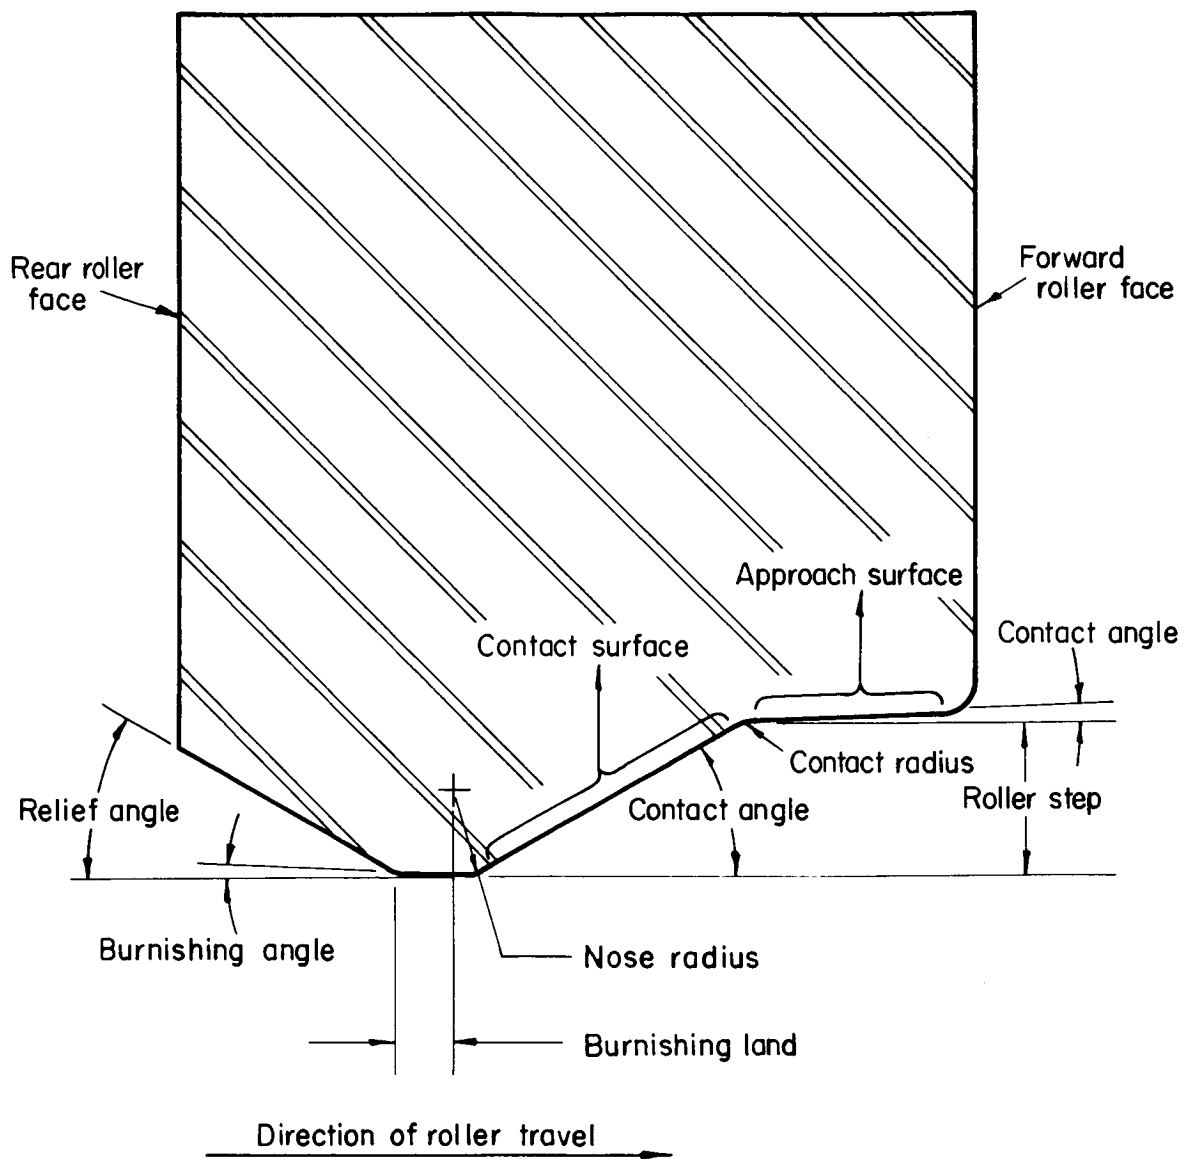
ROLLER CONFIGURATION FOR SHEAR FORMING (REF. 87)
